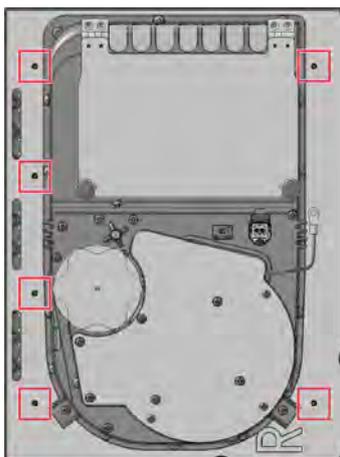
VACUUM TABLE ELEMENT RIGHT
